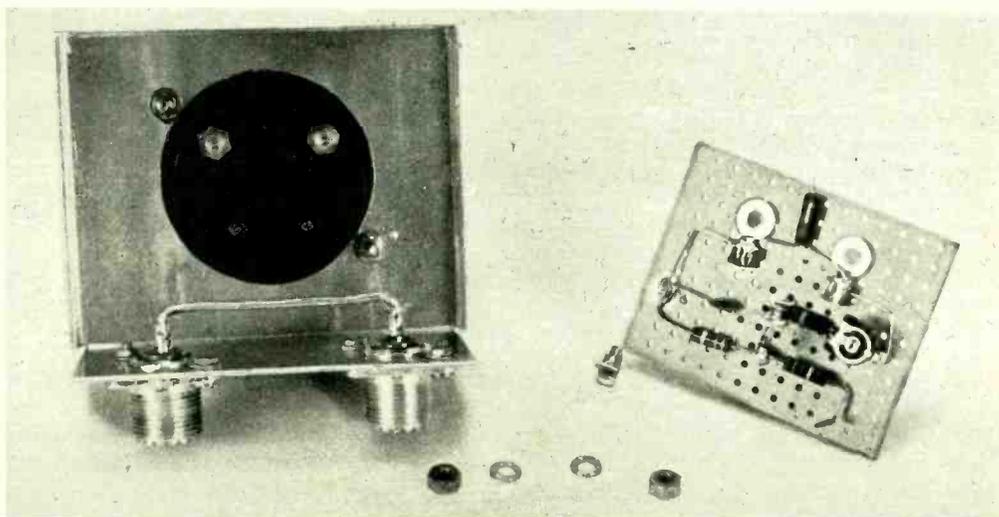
Meter M1 shown installed in minibox along with J1, J2 and connecting wire. Prewire perfboard chassis before mounting it with hardware supplied. Connect ground lug from pc board circuit to minibox.
